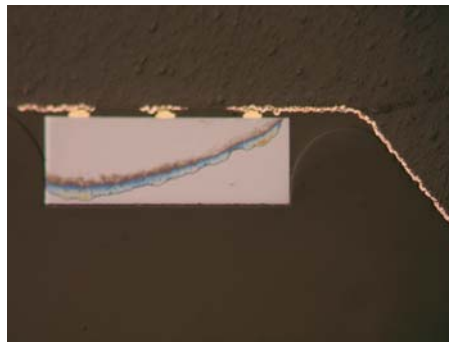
NCA flip-chip assembly in detail. Cross-section through the contact pads
